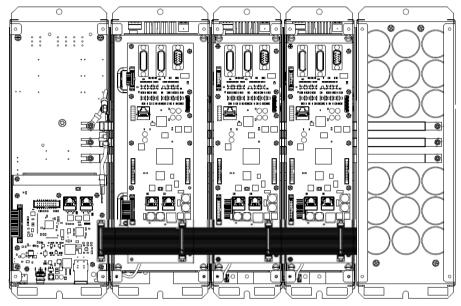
Connection of the 24Vdc Ribbon Cable to the PIU and Drive controller PCBAs
